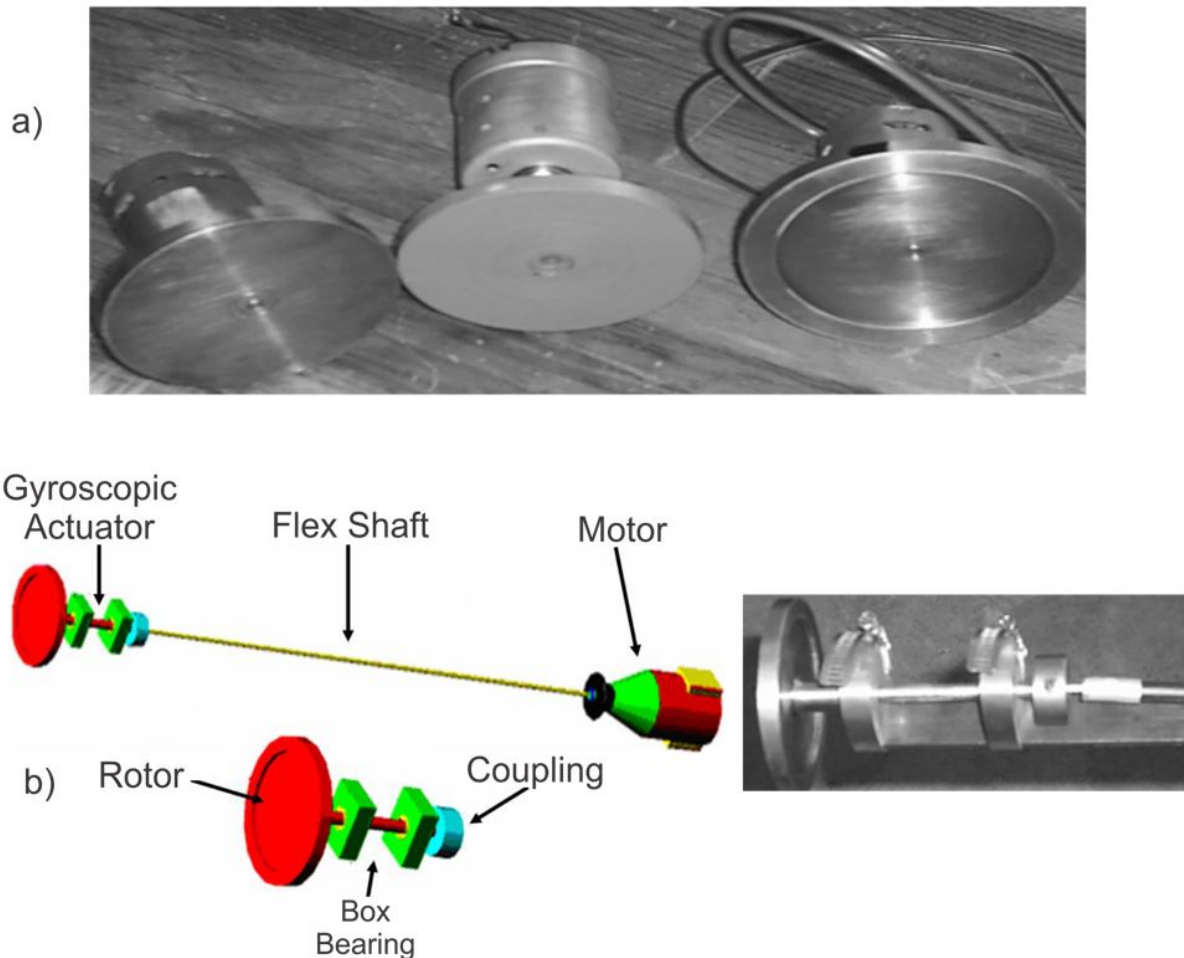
a) Explored design alternatives for the gyroscopic actuator, b) Final assembly of rigid beam actuator
